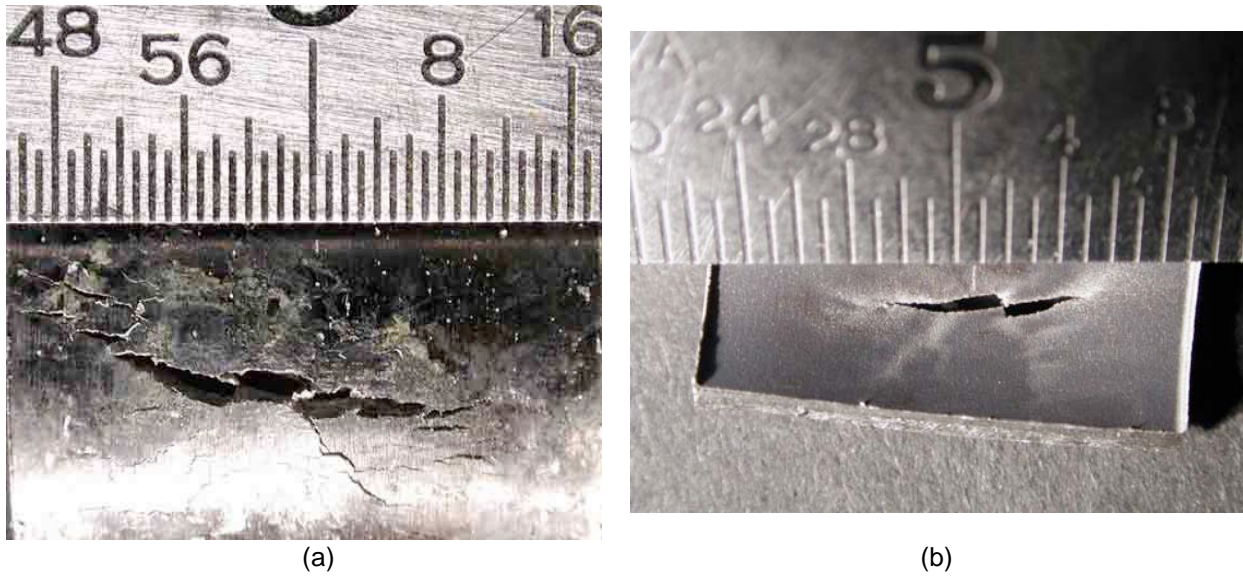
Picture of (a) OD and (b) ID surfaces of specimen 39–57–2 after the end of the test.
